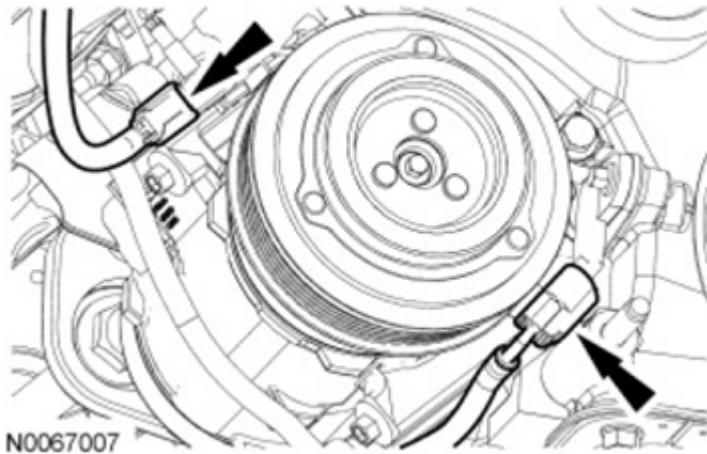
Locating A/C Compressor And Crankshaft Position Sensor Electrical Connectors
